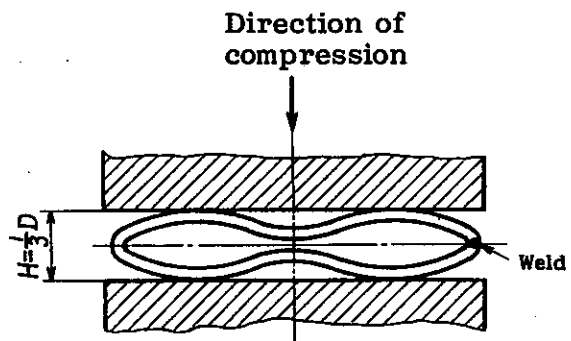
Flattening Test of Portion Other Than Weld
